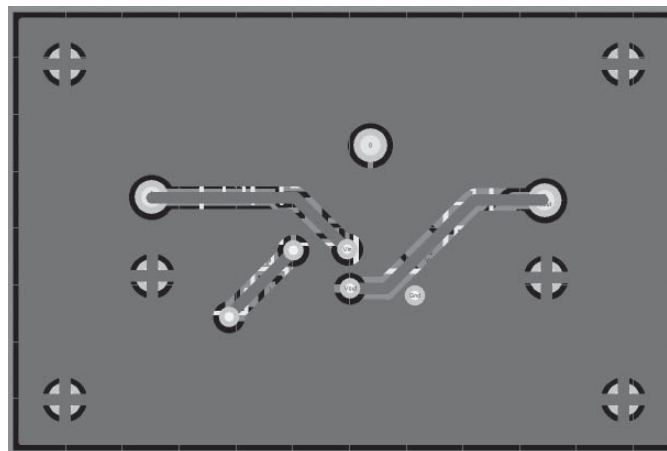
AAT2120 Evaluation Board Bottom Side Layout.
